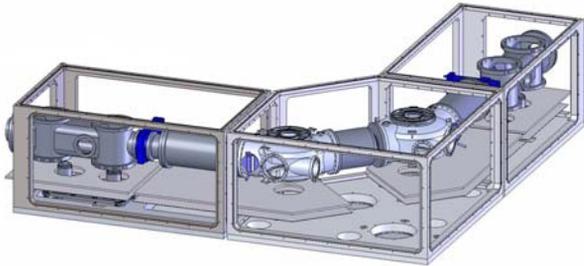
Design drawing of one corner. The frames of the outer chambers and the inner cold chambers are visible. Large rectangular flanges allow easy access.
